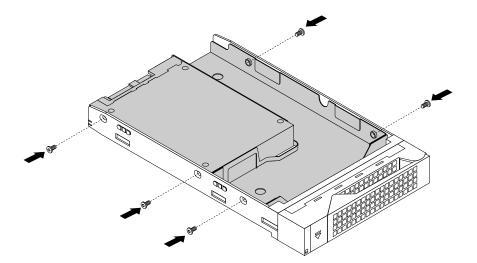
Installing the screws to secure the drive adapter and the solid-state drive to the bracket
